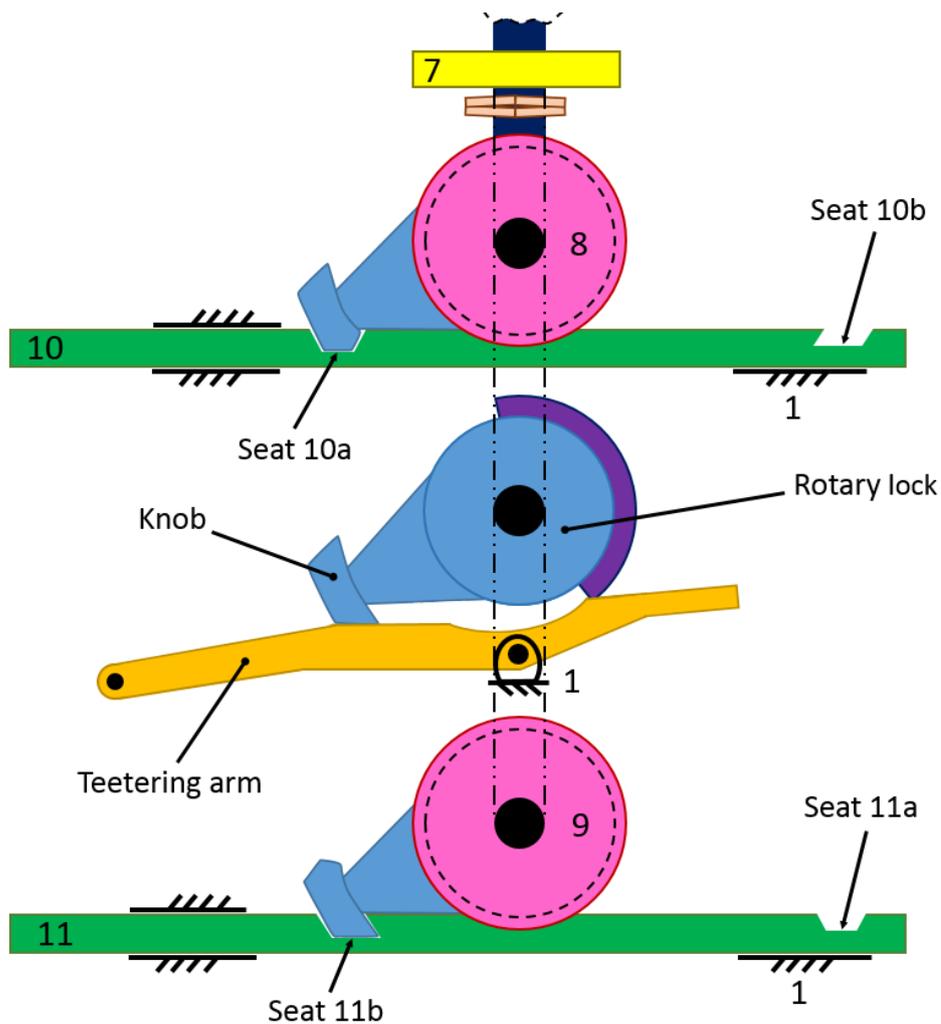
Representative schematic model of locking mechanism together with the driving mechanism from side view
